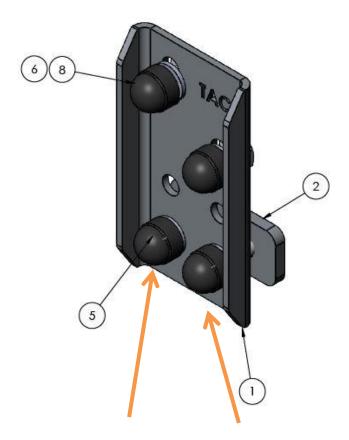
Button Head Bolts with Flat Washers and Spring Washers
